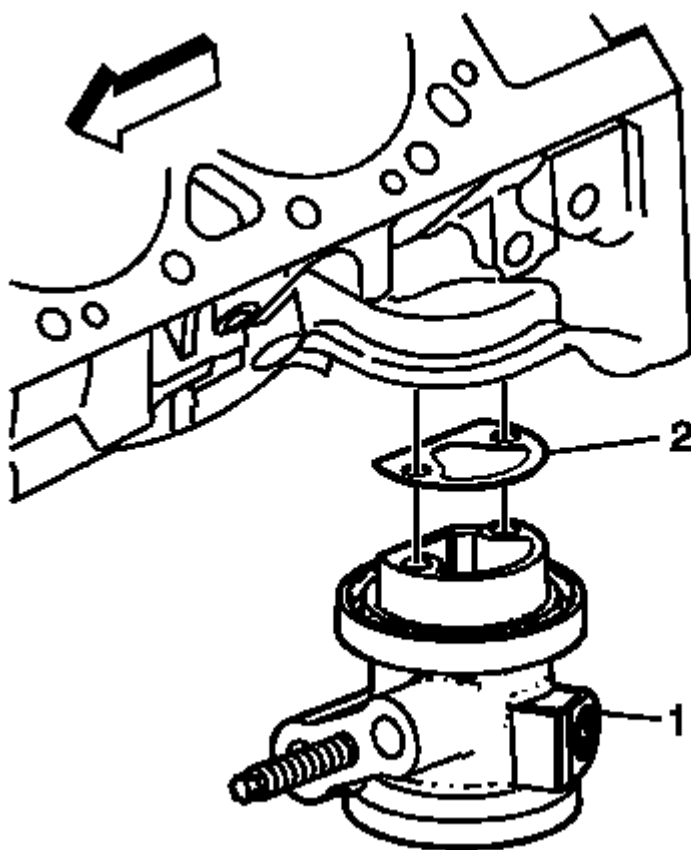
Identifying Oil Filter Adapter And Oil Filter Adapter Gasket
